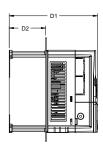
Wall mounting diagram for 380V 220–315kW models Table C-1 Wall mounting dimensions of 380V VFD models (unit: mm)
